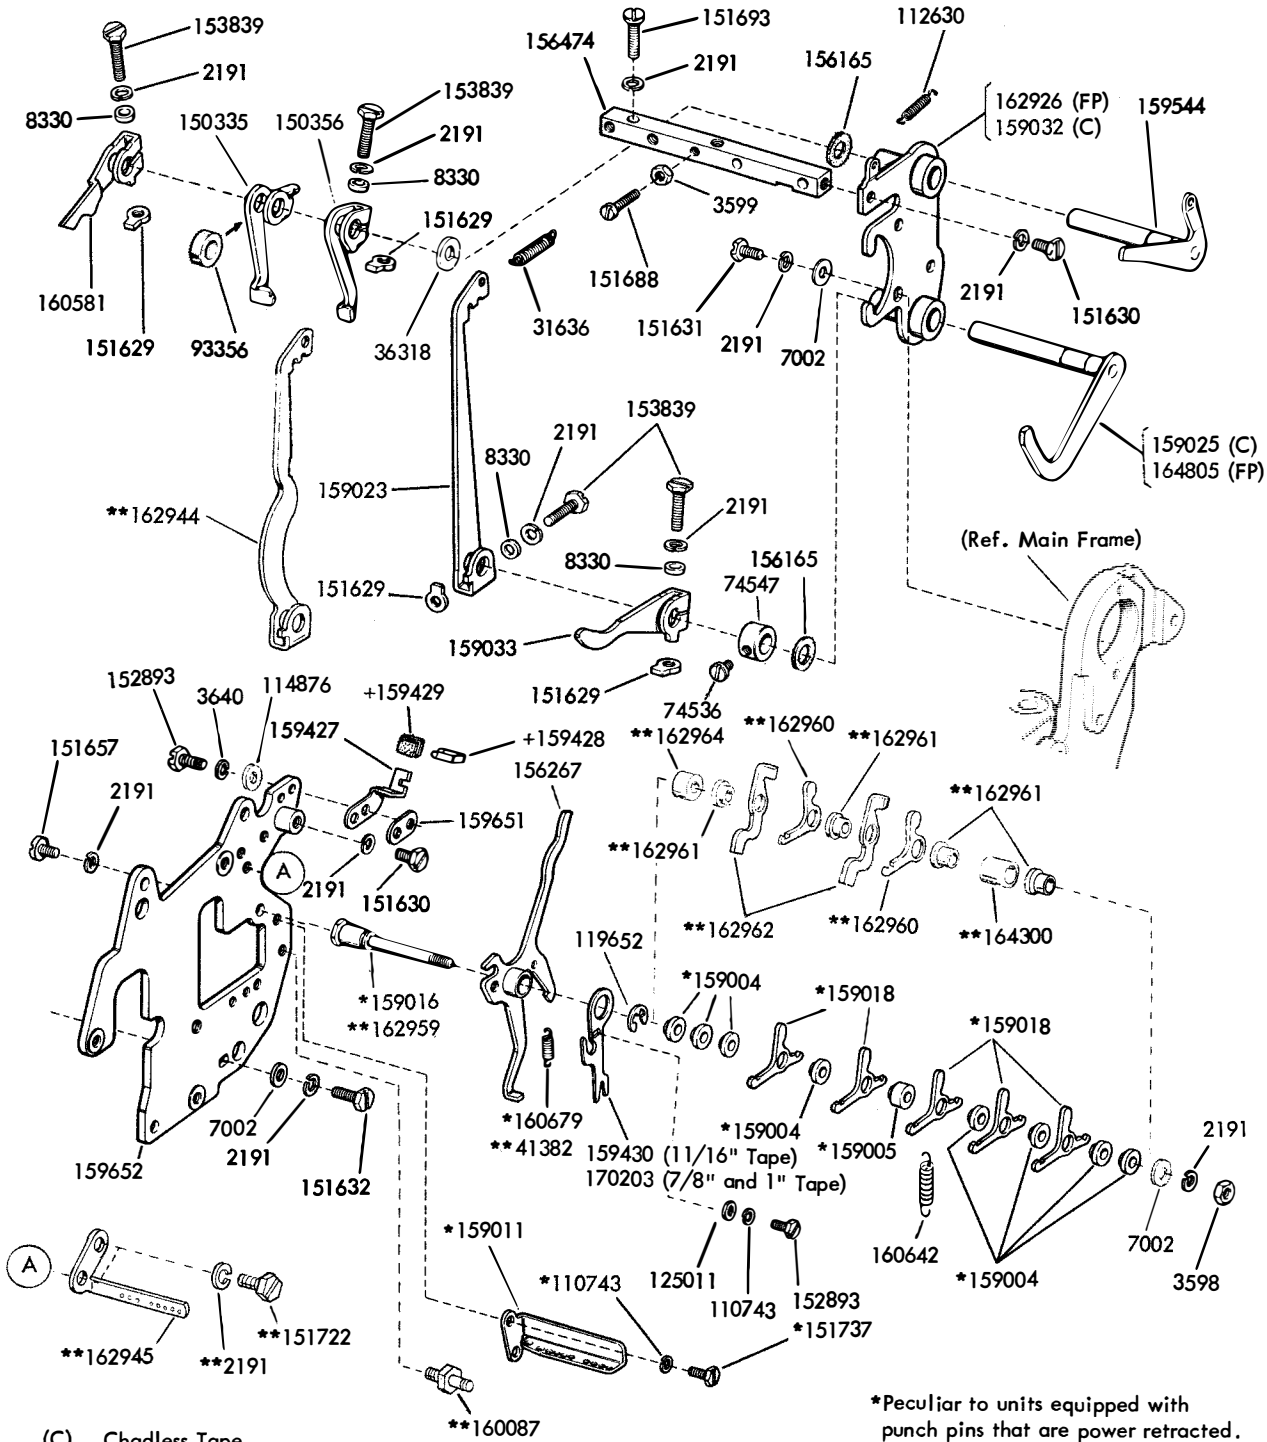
MAIN SHAFT ASSEMBLY
